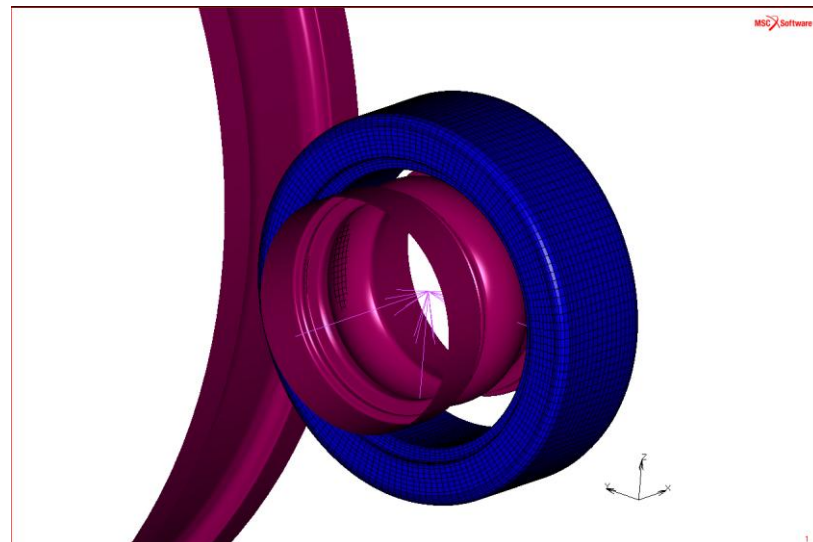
Solid mesh structure for ring workpiece in three-dimensional finite element model
